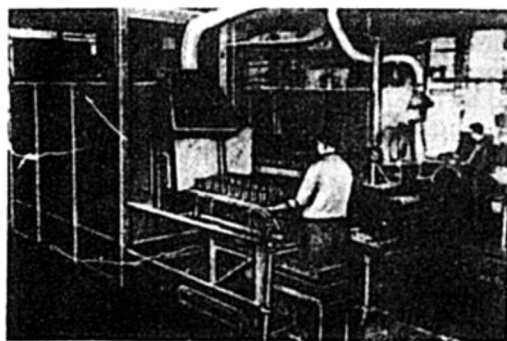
Conveyor type furnace for soldering in a reducing atmosphere
